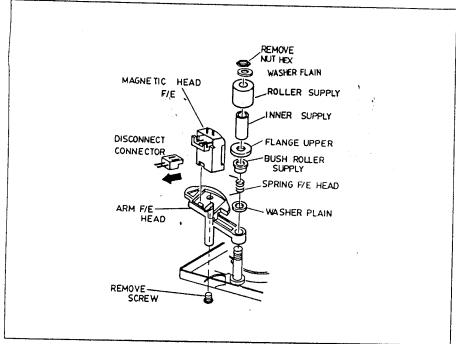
Full Erase (FE) Head/Supply Roller Romoval
